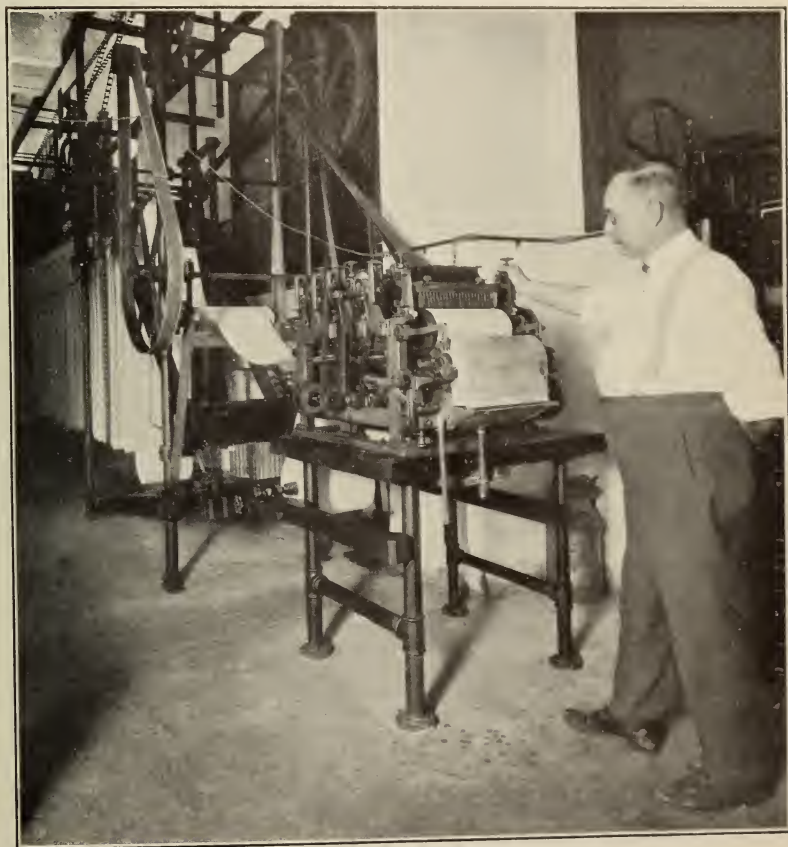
Paper coating machine (without drying cabinet)
